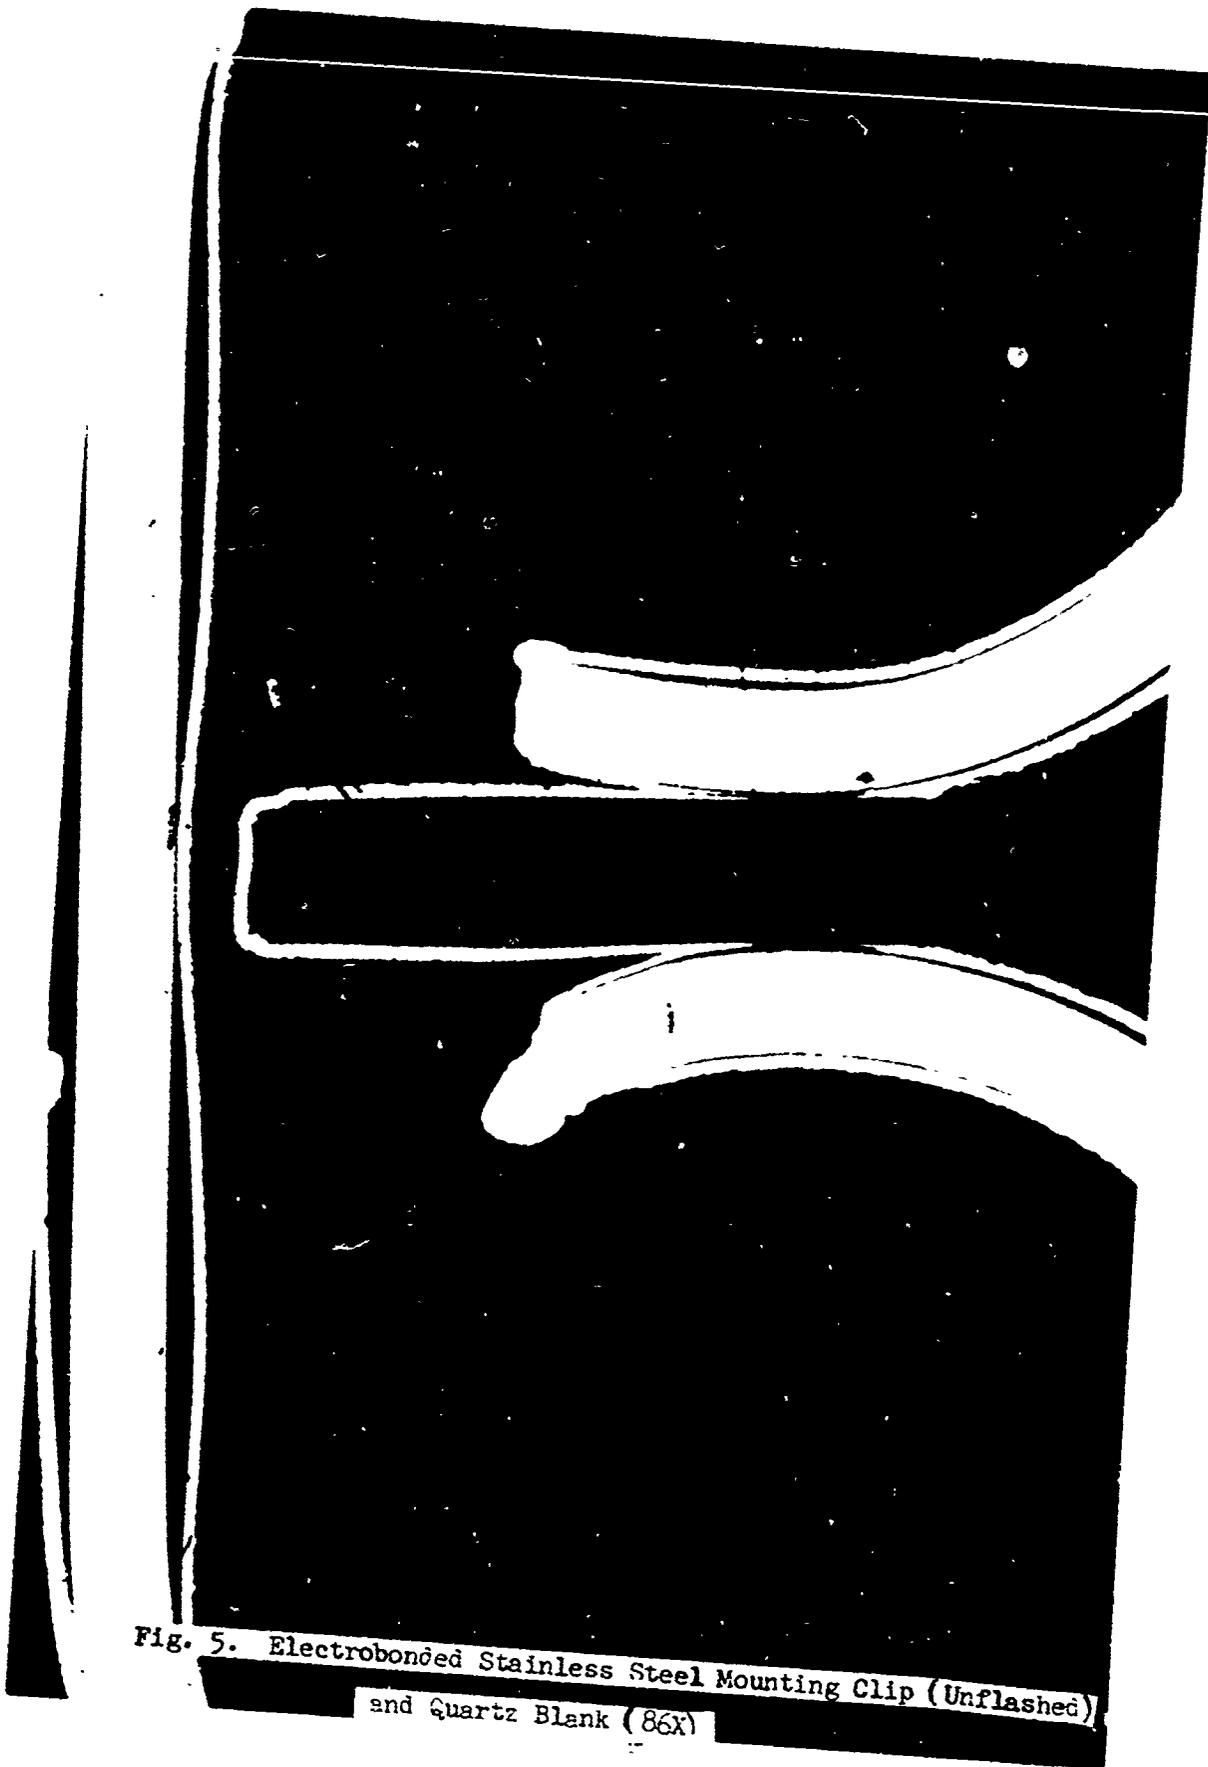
Electrobonded Stainless Steel Mounting Clip (Unflashed)
